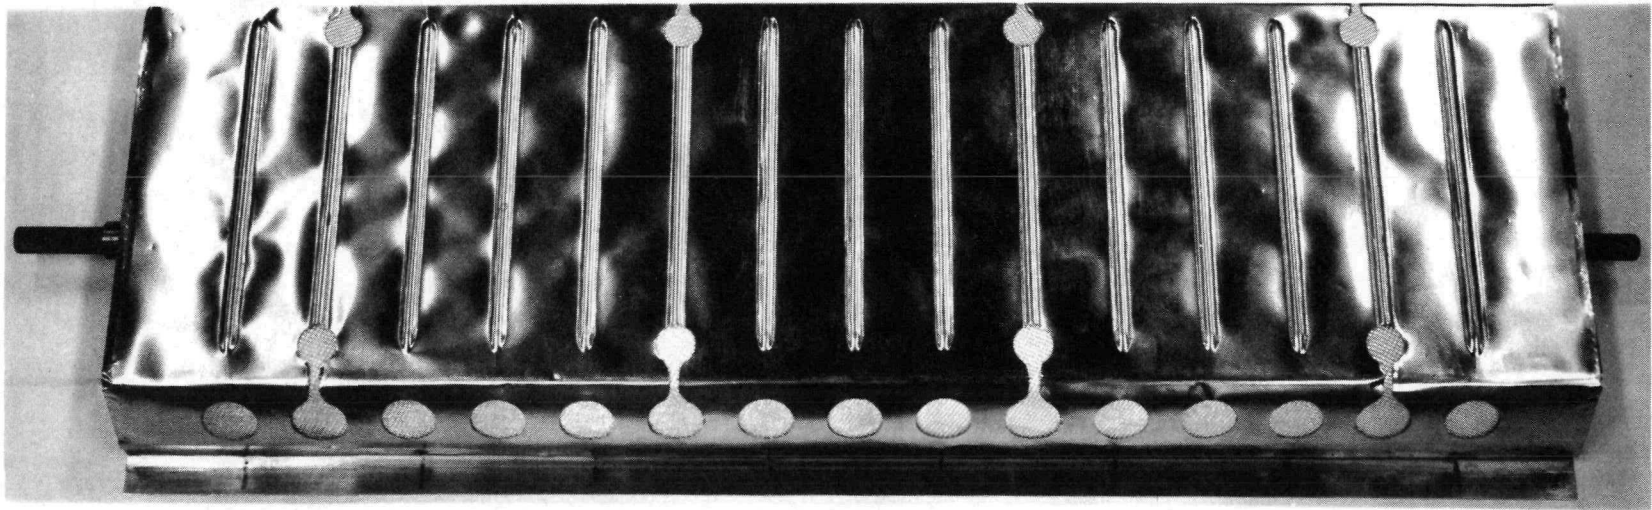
BRAZED HONEYCOMB SHUTTER ASSEMBLY
